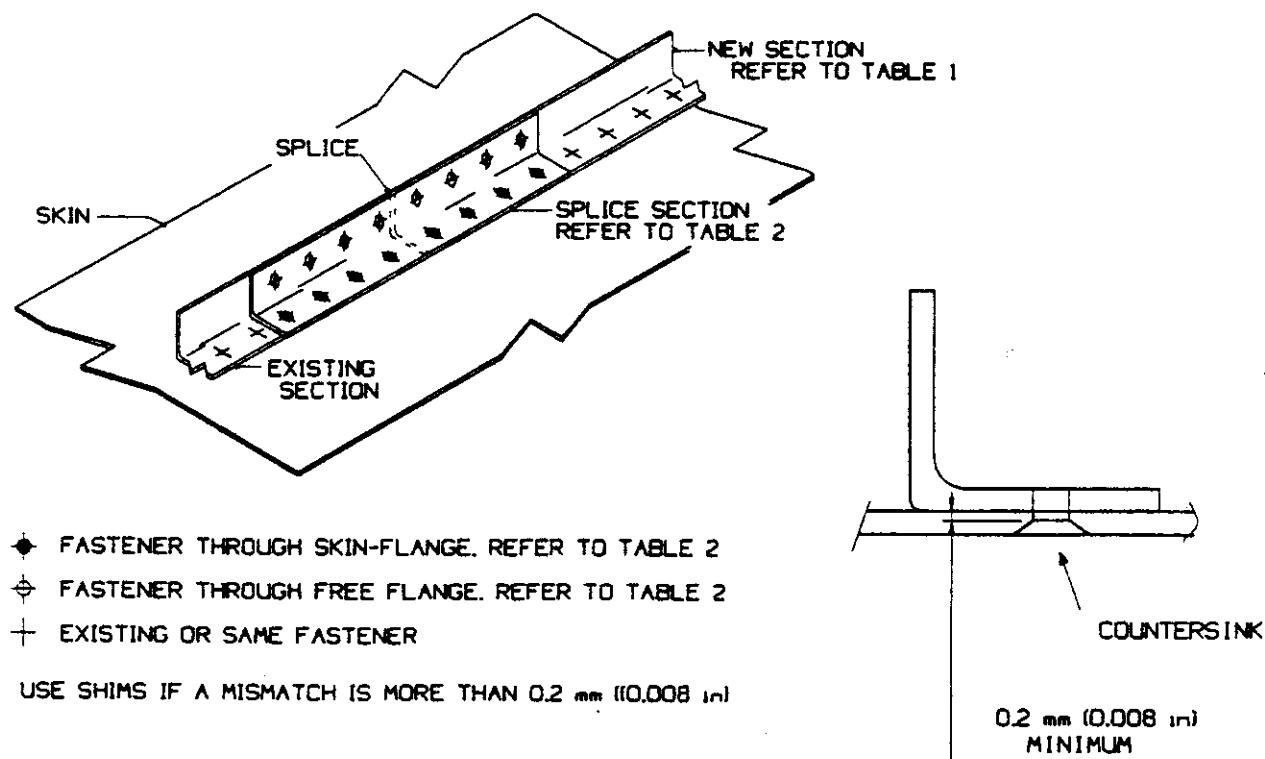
Repair to Extruded and Sheet-metal Sections
